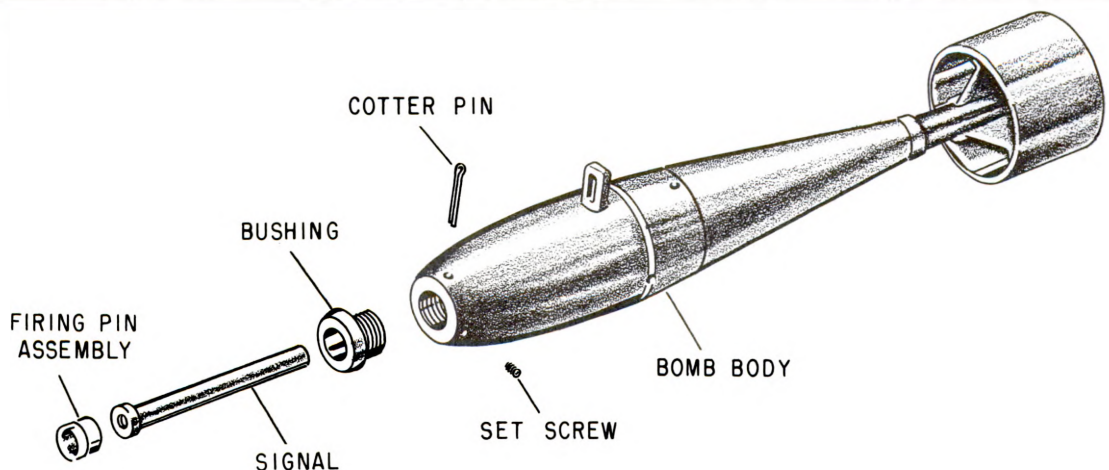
Practice Bomb Mk 76 and Mods, exploded view.
